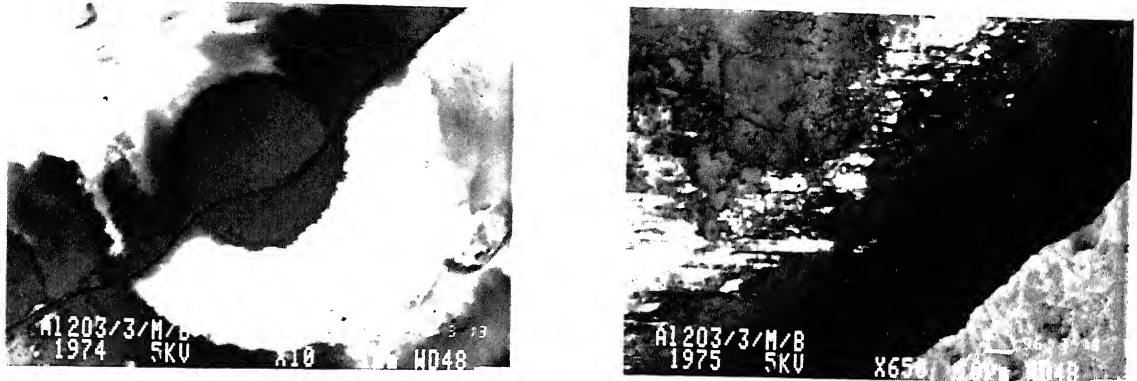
Full view of machined surface having through crack, Sample no: (3)
